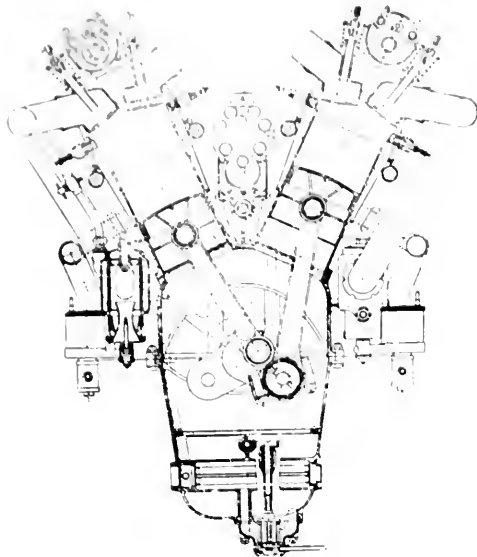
12-CYLINDER WATER-COOLED RENAULT ENGINE.
